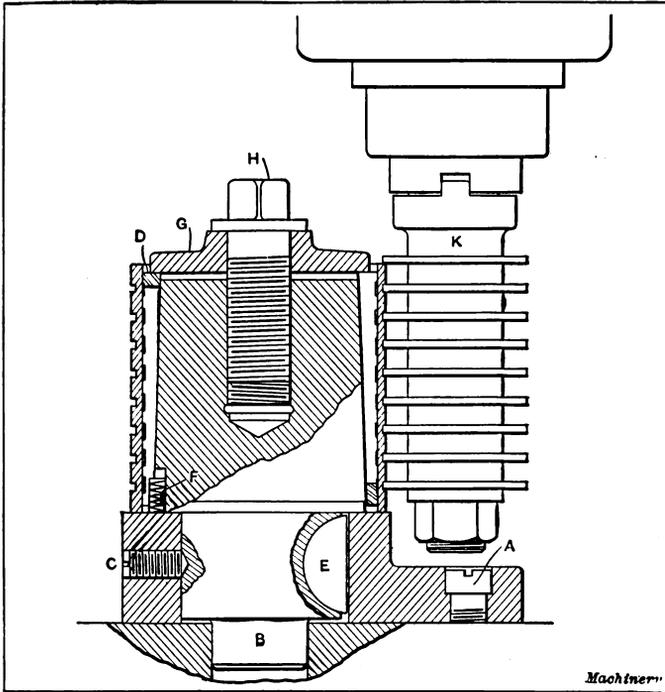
Expanding Arbor for holding Casting while Gang-sawing Packing Rings
